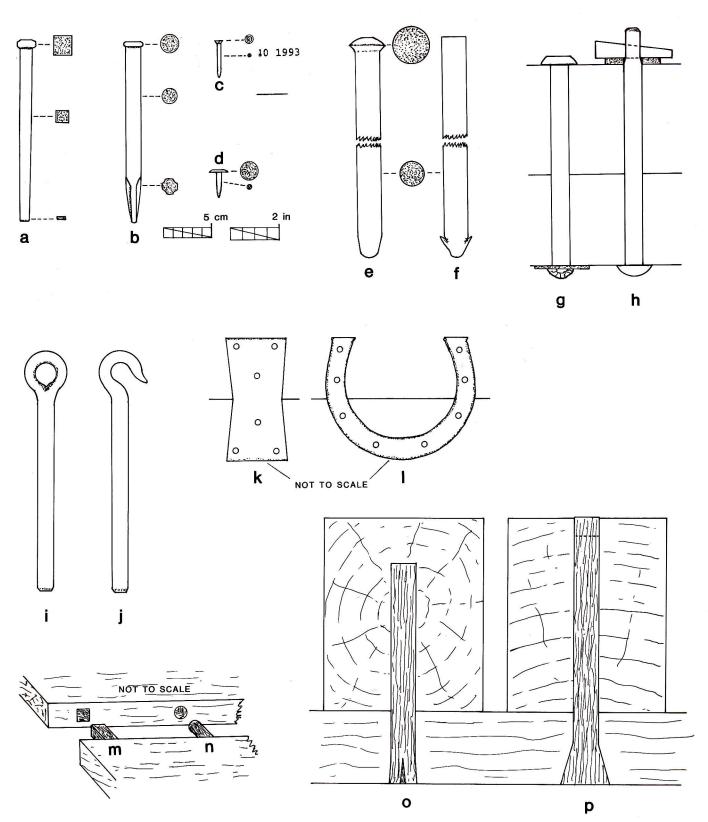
Typical fastenings: (a) square-headed spike used for planking and general fastening; (b) round-headed dump used for similar fastening; (c) nineteenth-century copper nail used to attach copper sheathing to hull bottoms; (d) fourth-century B.C. copper nail used to fasten lead sheathing to hull bottoms; (e) a short drift bolt; (f) unheaded rag bolt, barbed with a chisel to deter withdrawal; bolts were sometimes made without heads, the head being formed by pounding; they could be used with or without roves (washers); (g) clench bolt, often designated as "bolt" in contemporary documents (see figs. 3-28 and 4-28 for other forms of clenched fastenings); (h) forelock bolt; (i) eye bolt; (j) hook bolt; (k) fishplate; (l) horseshoe plate; (m) planks being aligned with a rectangular, or block, coak and (n) with a cylindrical coak (dowel); (o) a wedged treenail in a blind hole; (p) a headed treenail in a through hole; it is wedged at its inner end.
